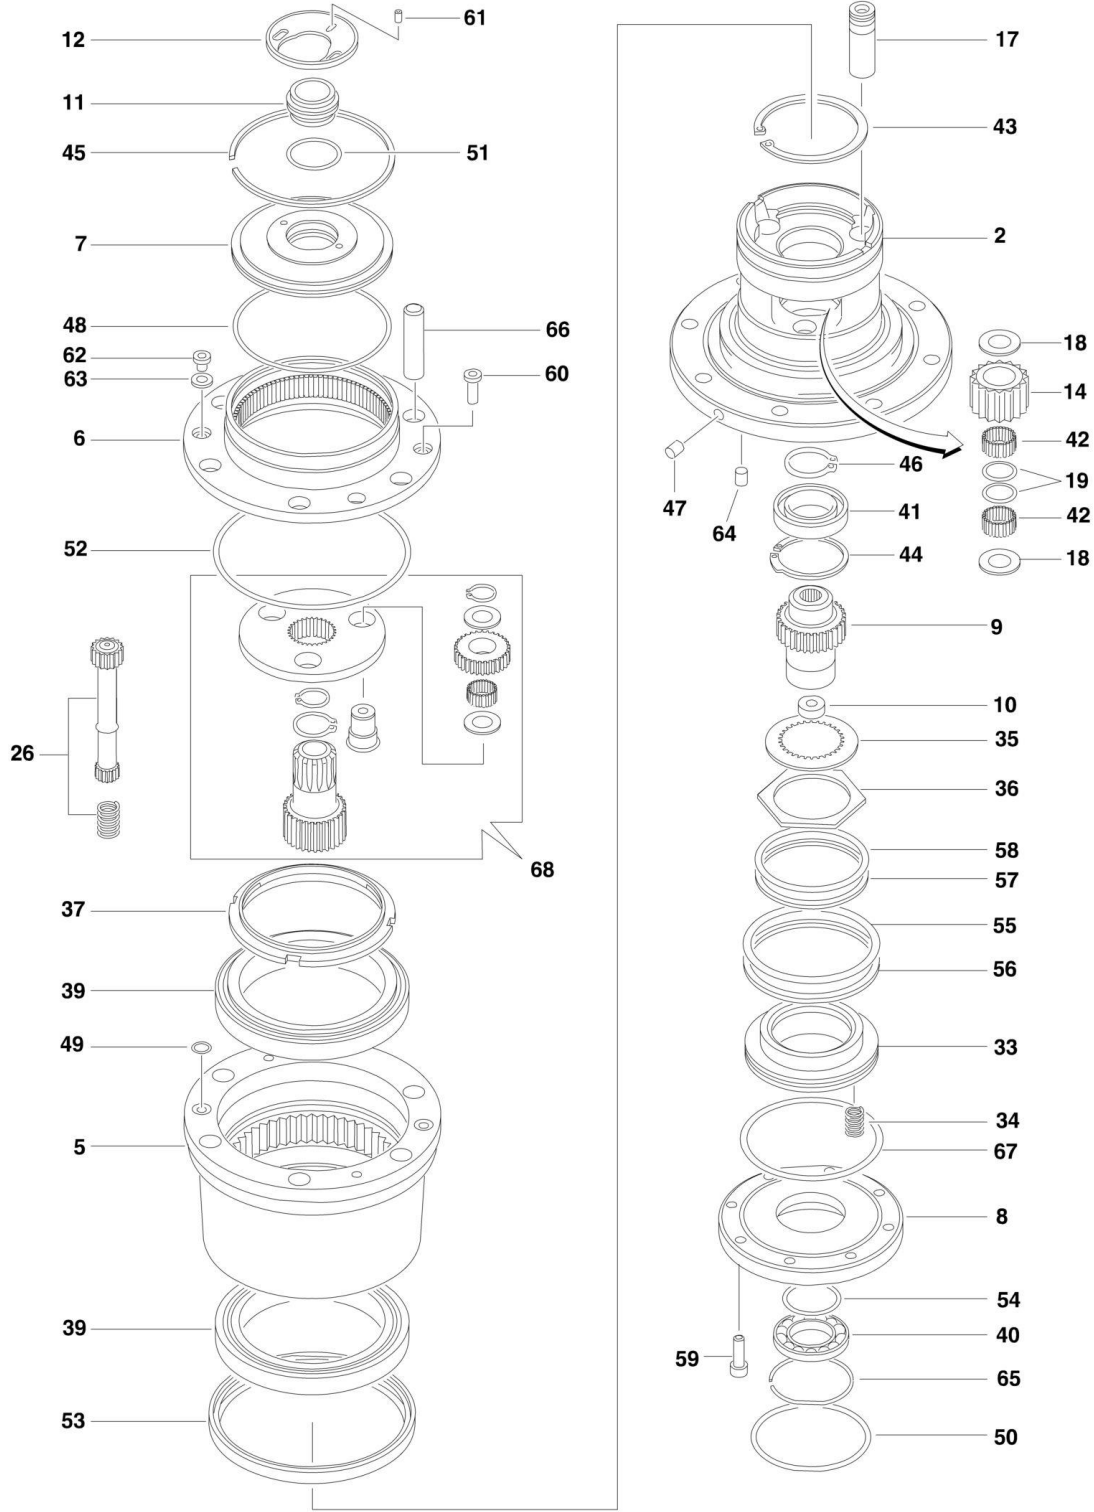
DRIVE MOTOR ASSEMBLY
